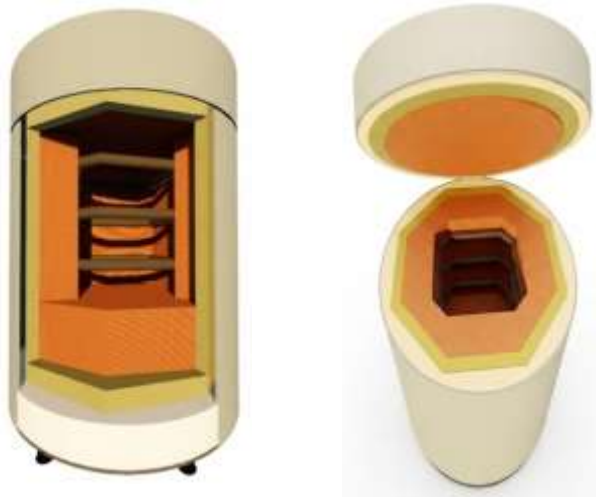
Three-dimensional view of the engineered electric crucible furnace prototype.
